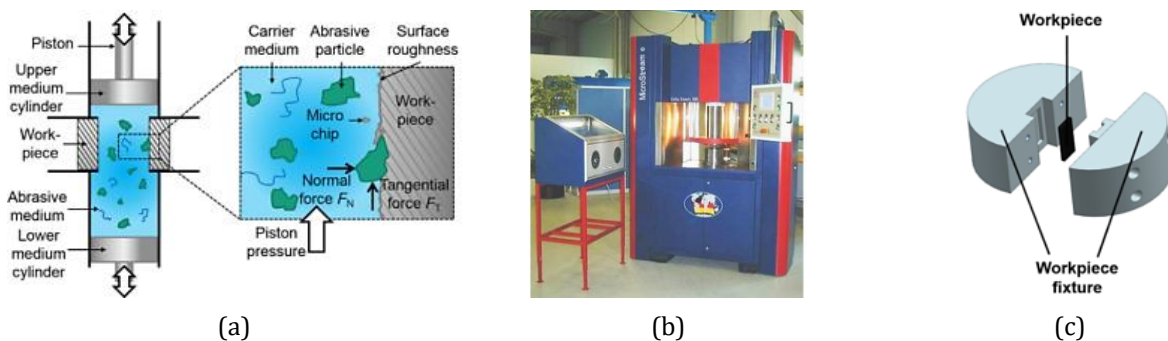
(a) Two-way AFM, (b) ExtrudeHone machine, (c) Workpiece [45].
